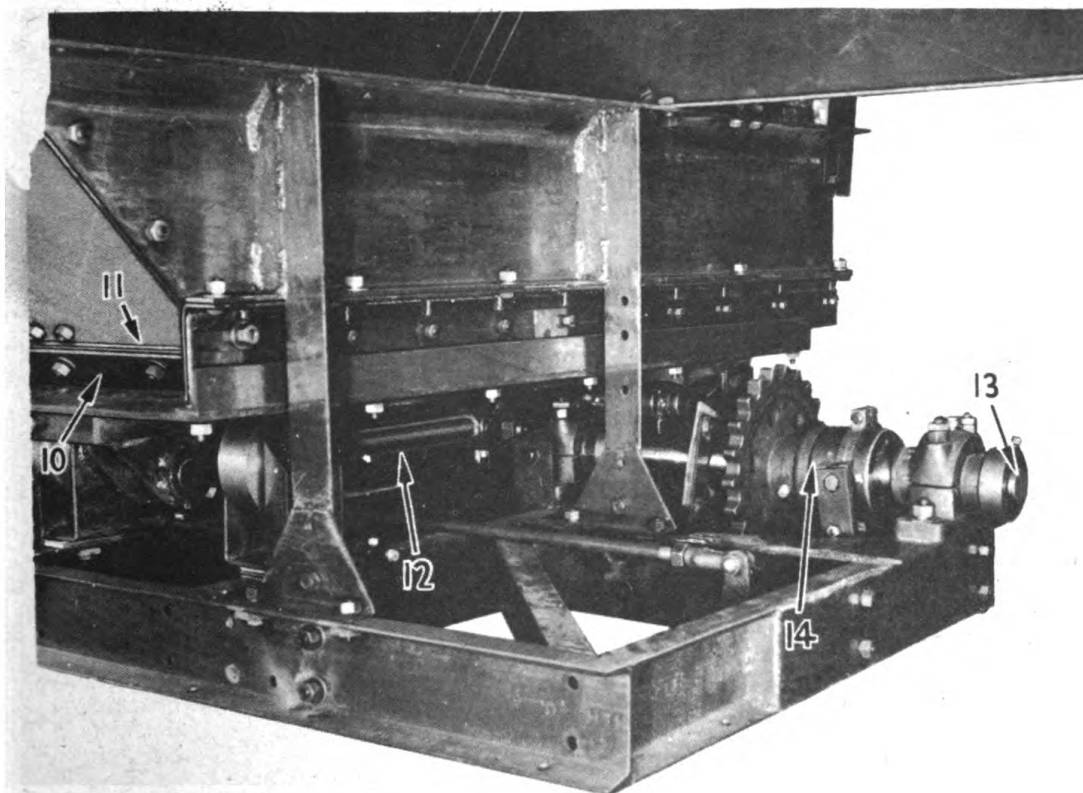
DRIVING SIDE OF RECIPROCATING FEEDER.
